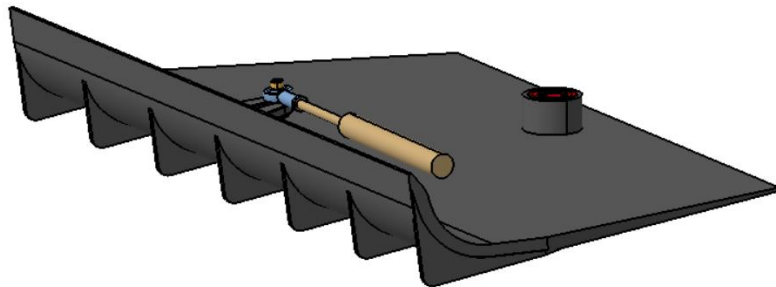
Front isometric view of the diffuser assembly prototype [own elaboration, 2021]
